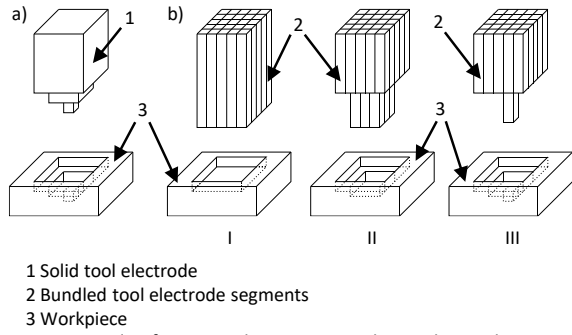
Example of a pyramid geometry sunk into the workpiece; a) conventional process; b) with a segmented tool electrode
